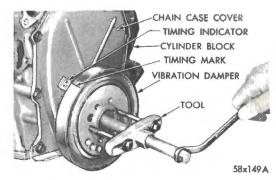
Removing Vibration Damper Assembly Using Tool C-3688
